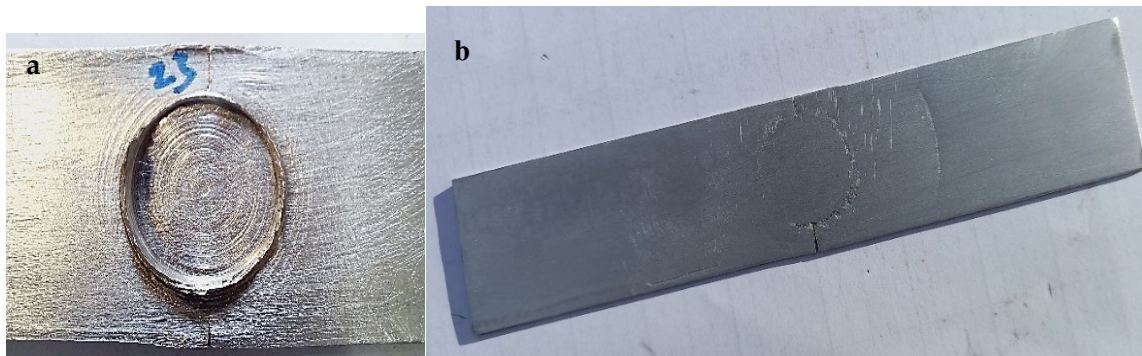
Welded Sheets a) Before Removing the Flash. b) After Removing the Flash.
